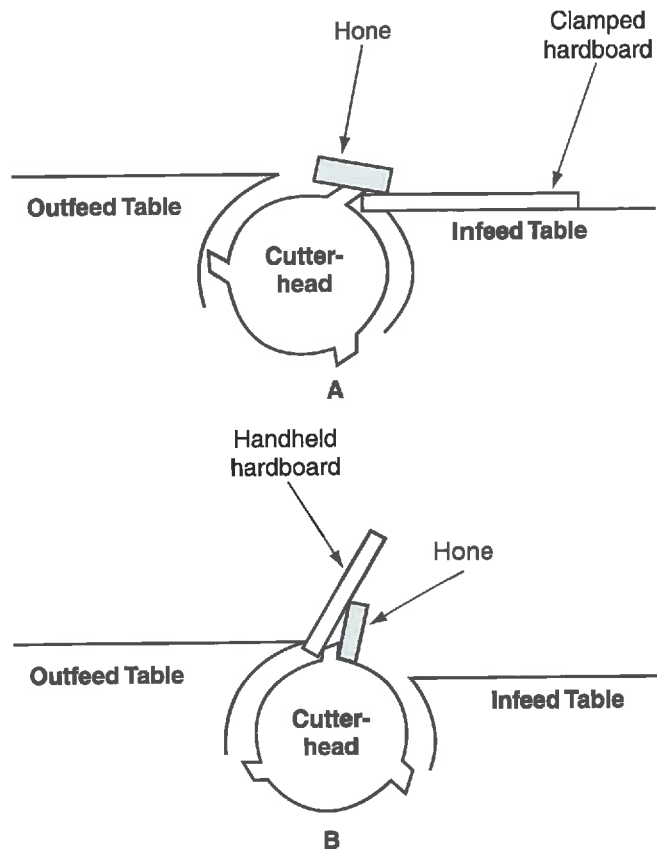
A—Honing the backs of the jointer knives. B—Honing the fronts of the jointer knives.
